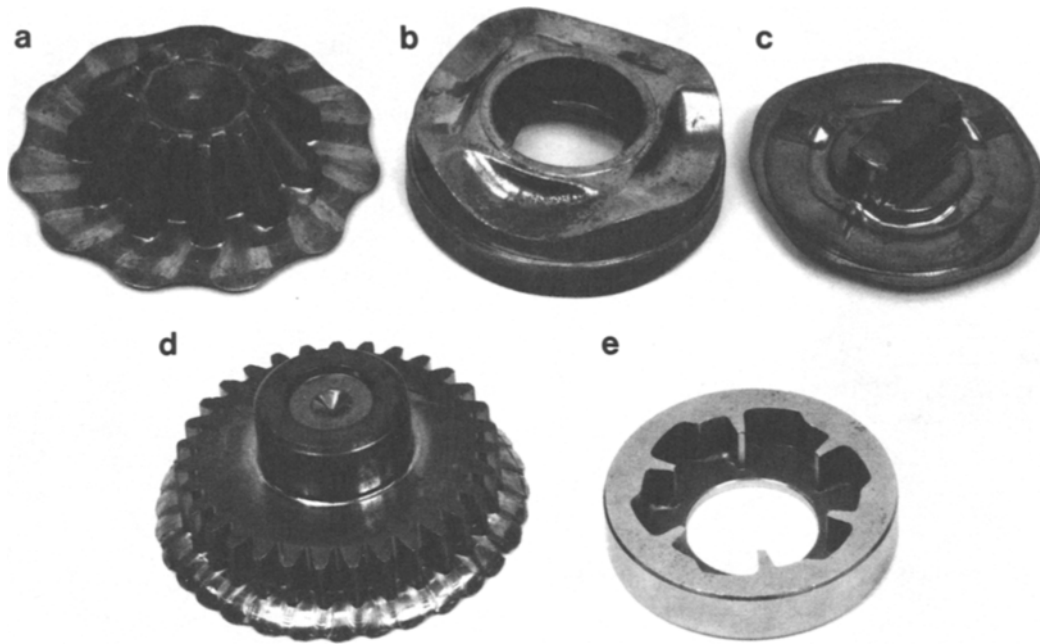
Sample parts made by cold orbital forging: (a) Bevel gear, (b) cam disc, (c) central cam, (d) reverse idler and (e) cam race [32].
